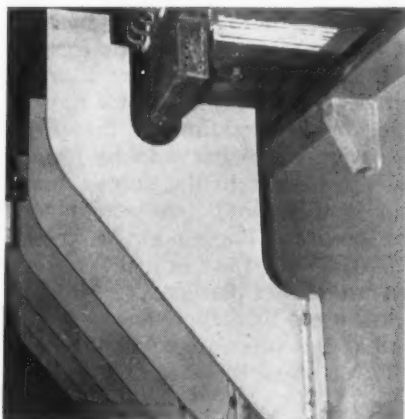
Close-up view of the lower platen supporting brackets. Note that the brackets are bolted to the press frame so that the entire structure can be removed easily.
